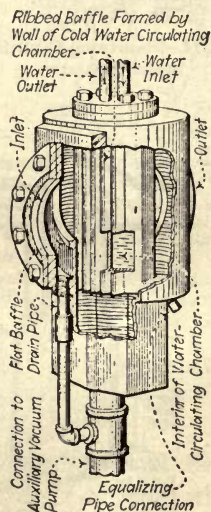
Baum Baffle-Plate Horizontal Exhaust-Steam Separator For Vacuum Service.
